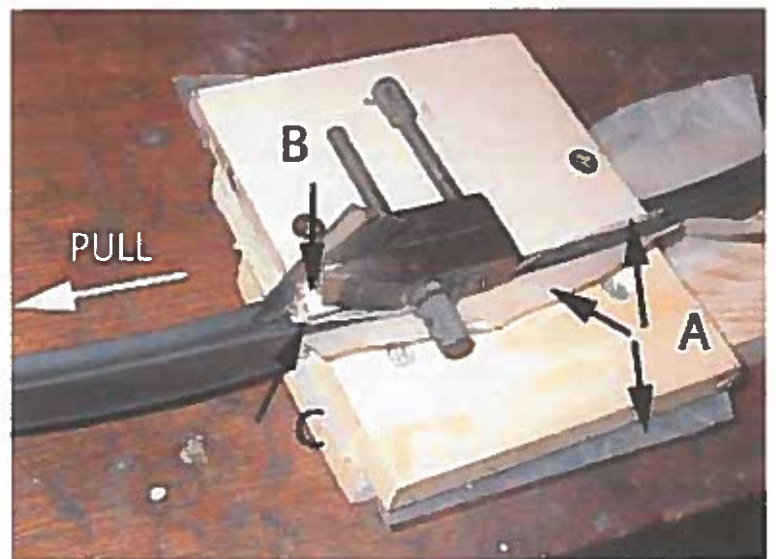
This wood fixture was constructed to create a cavity through which the seal material can be drawn. A polyethylene plastic lining (A) is used to reduce friction. A thin slit (B) in the top block positions the razor blade. The clamp sets the blade depth. There is a gap (C) to clear the seal flap (B in Photo 1). It is important that the seal be pulled through the tooling, as this causes it to contract laterally and reduce friction as it slides along.
